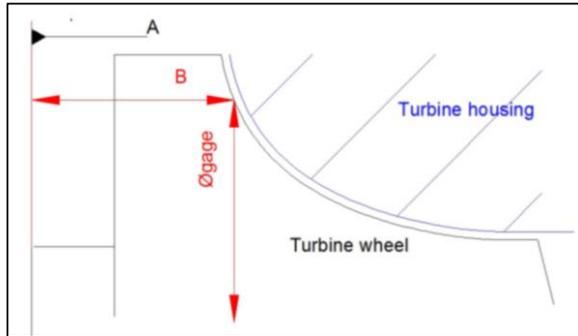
Measurement design for tolerance checking on the turbine wheel [14]
